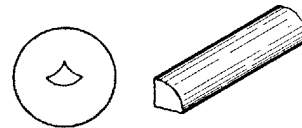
In die for extruding quarter-round seal, die opening has convex sides to give straight sides on the right-angle portion, and corners have a slight radius to help obtain smooth comers on extrusion.
